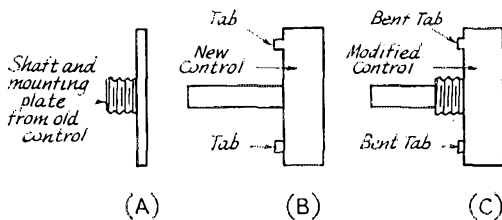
Steps in the conversion of a tab-mounted control to a shaft-mounted type.
